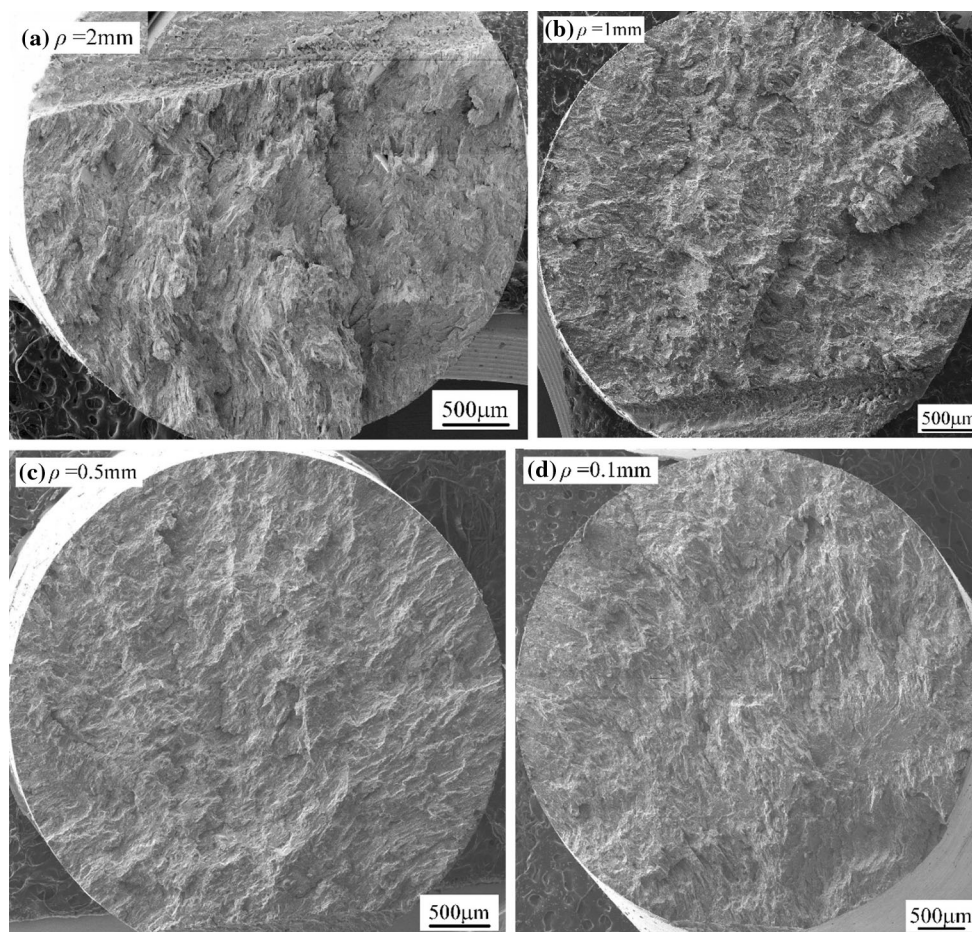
Fracture surface of tensile specimens with different notch depth for TiAl alloys
